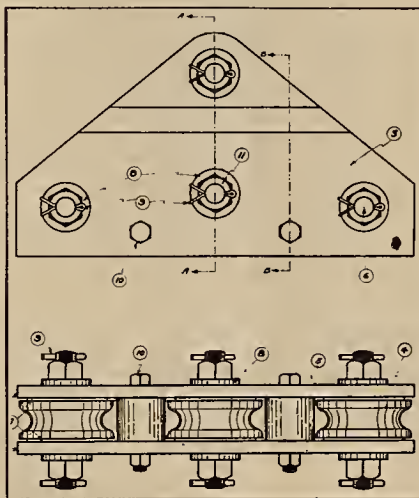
Details of 3-sheave conductor support for Pitt River crossing.
